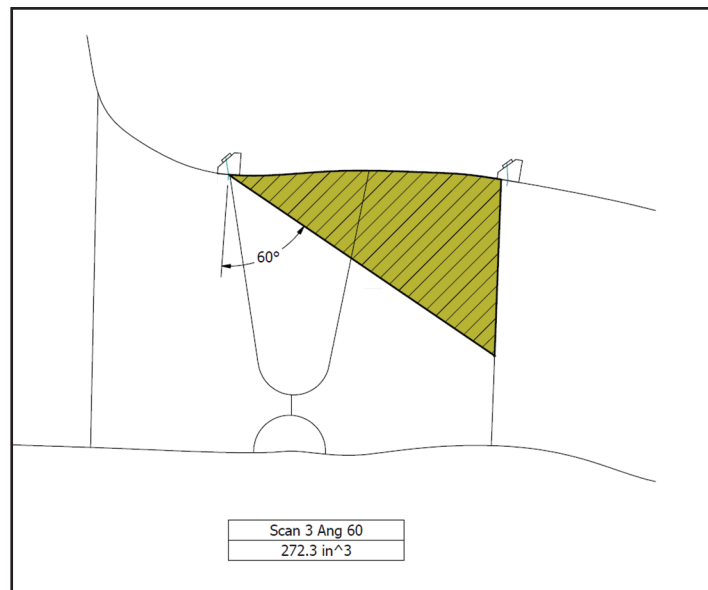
Weld RCW-21, 60° Nozzle Side Axial Scan
